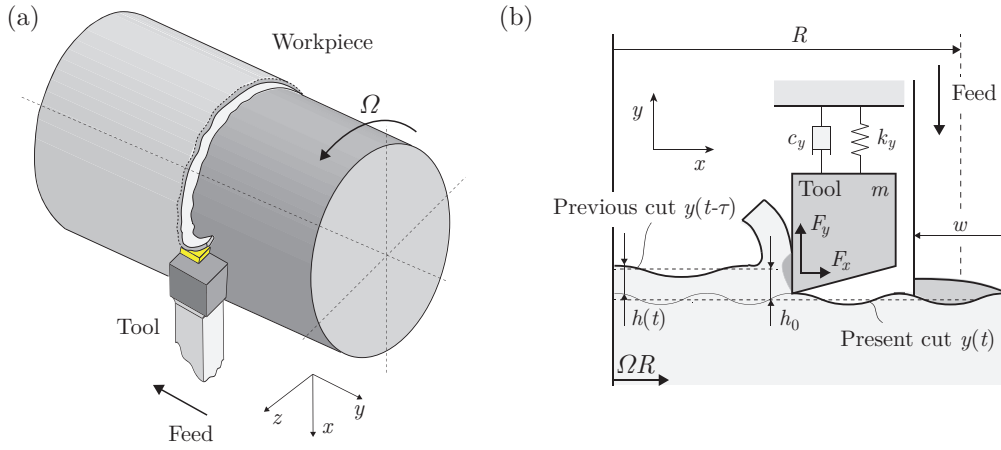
(a) Tool-workpiece arrangement where the tangential component of the cutting force acts on the tool as compression. (b) Mechanical model of surface regeneration in turning operation.
